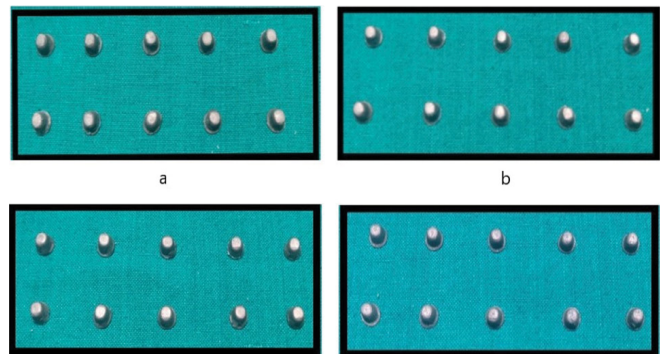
(a) Ni-Cr copings fabricated using conventional casting technique (Group I); (b) Co-Cr Casting fabricated using conventional casting technique (group II); (c) Co-Cr copings fabricated using CAD/CAM milling technique (Group III); (d) Co-Cr copings fabricated using DMLS technique (Group IV).
